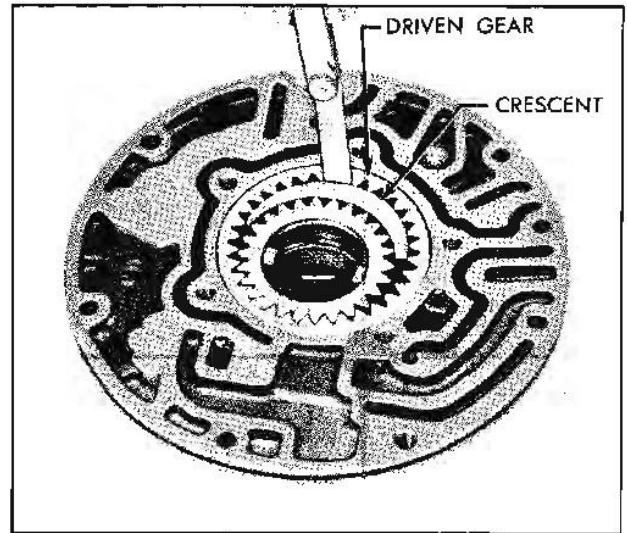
B-106 Checking Driven Gear to Crescent Clearance
